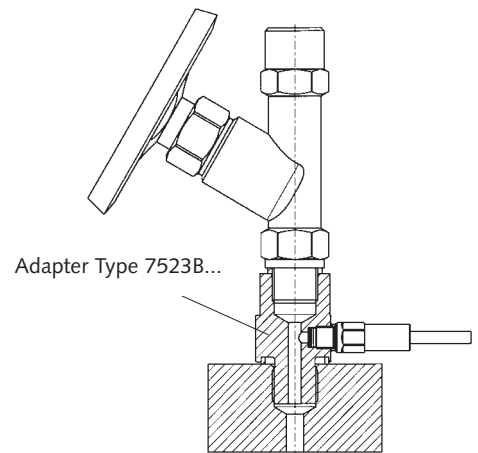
Sensor installed with adapter Type 7523B... underneath the indicator valve
